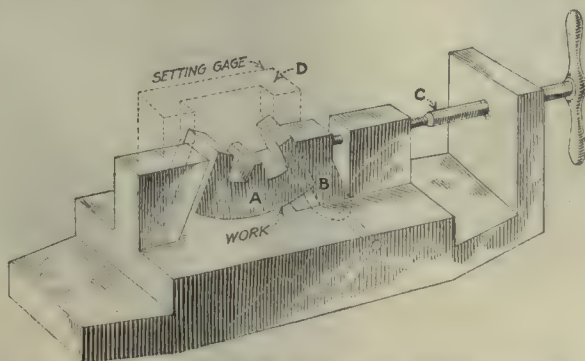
THE FIXTURE WITH ITS SETTING GAGE
